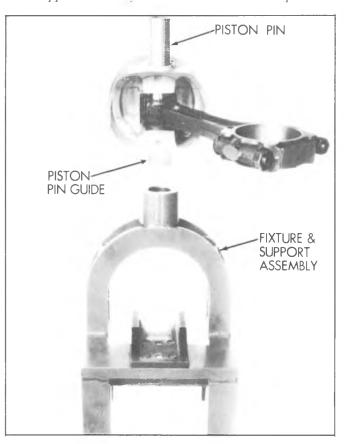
A-62--Piston Assembly Fixture Support Assembly
